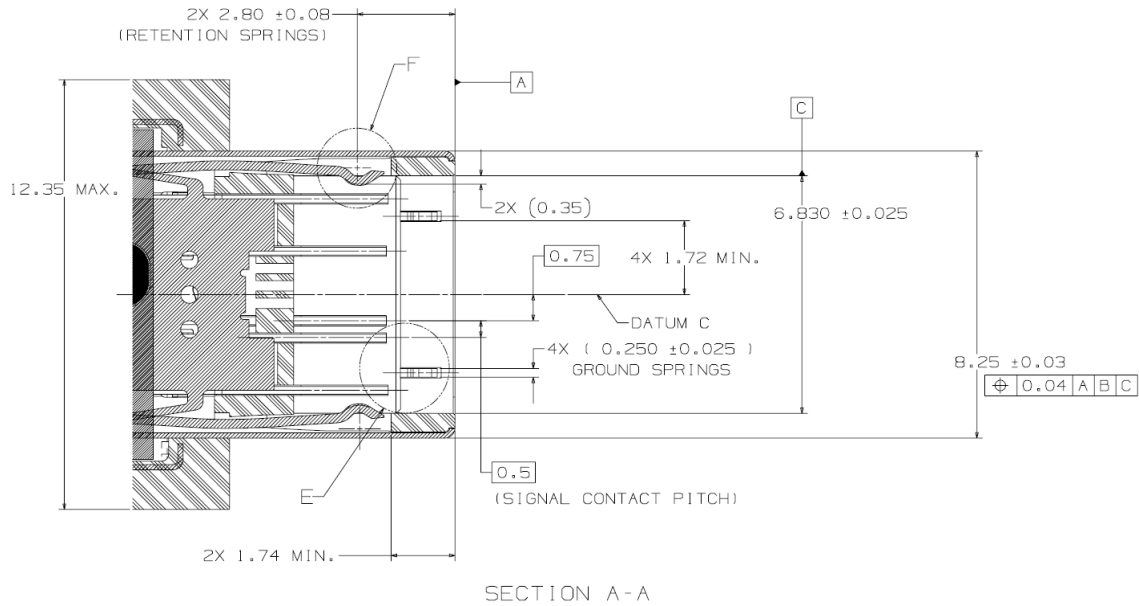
[USB 2.0](#) Type-C Plug Interface Dimensions
